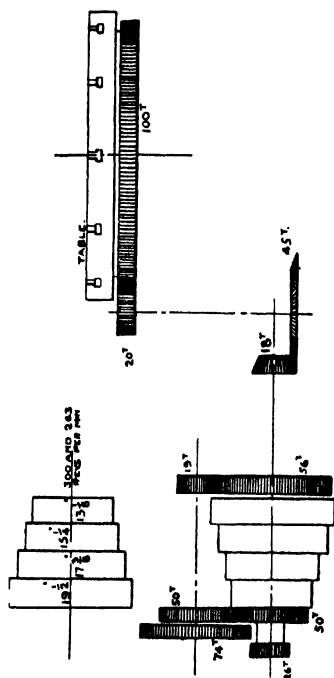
Diagram of drive of Richard's boring and turning mill.
